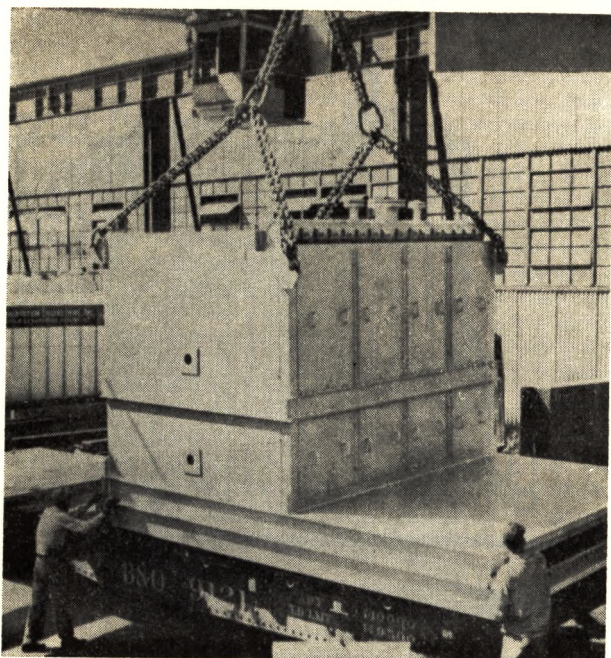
Convection bank (including casing) for a large boiler being shipped as a sub-assembly.
